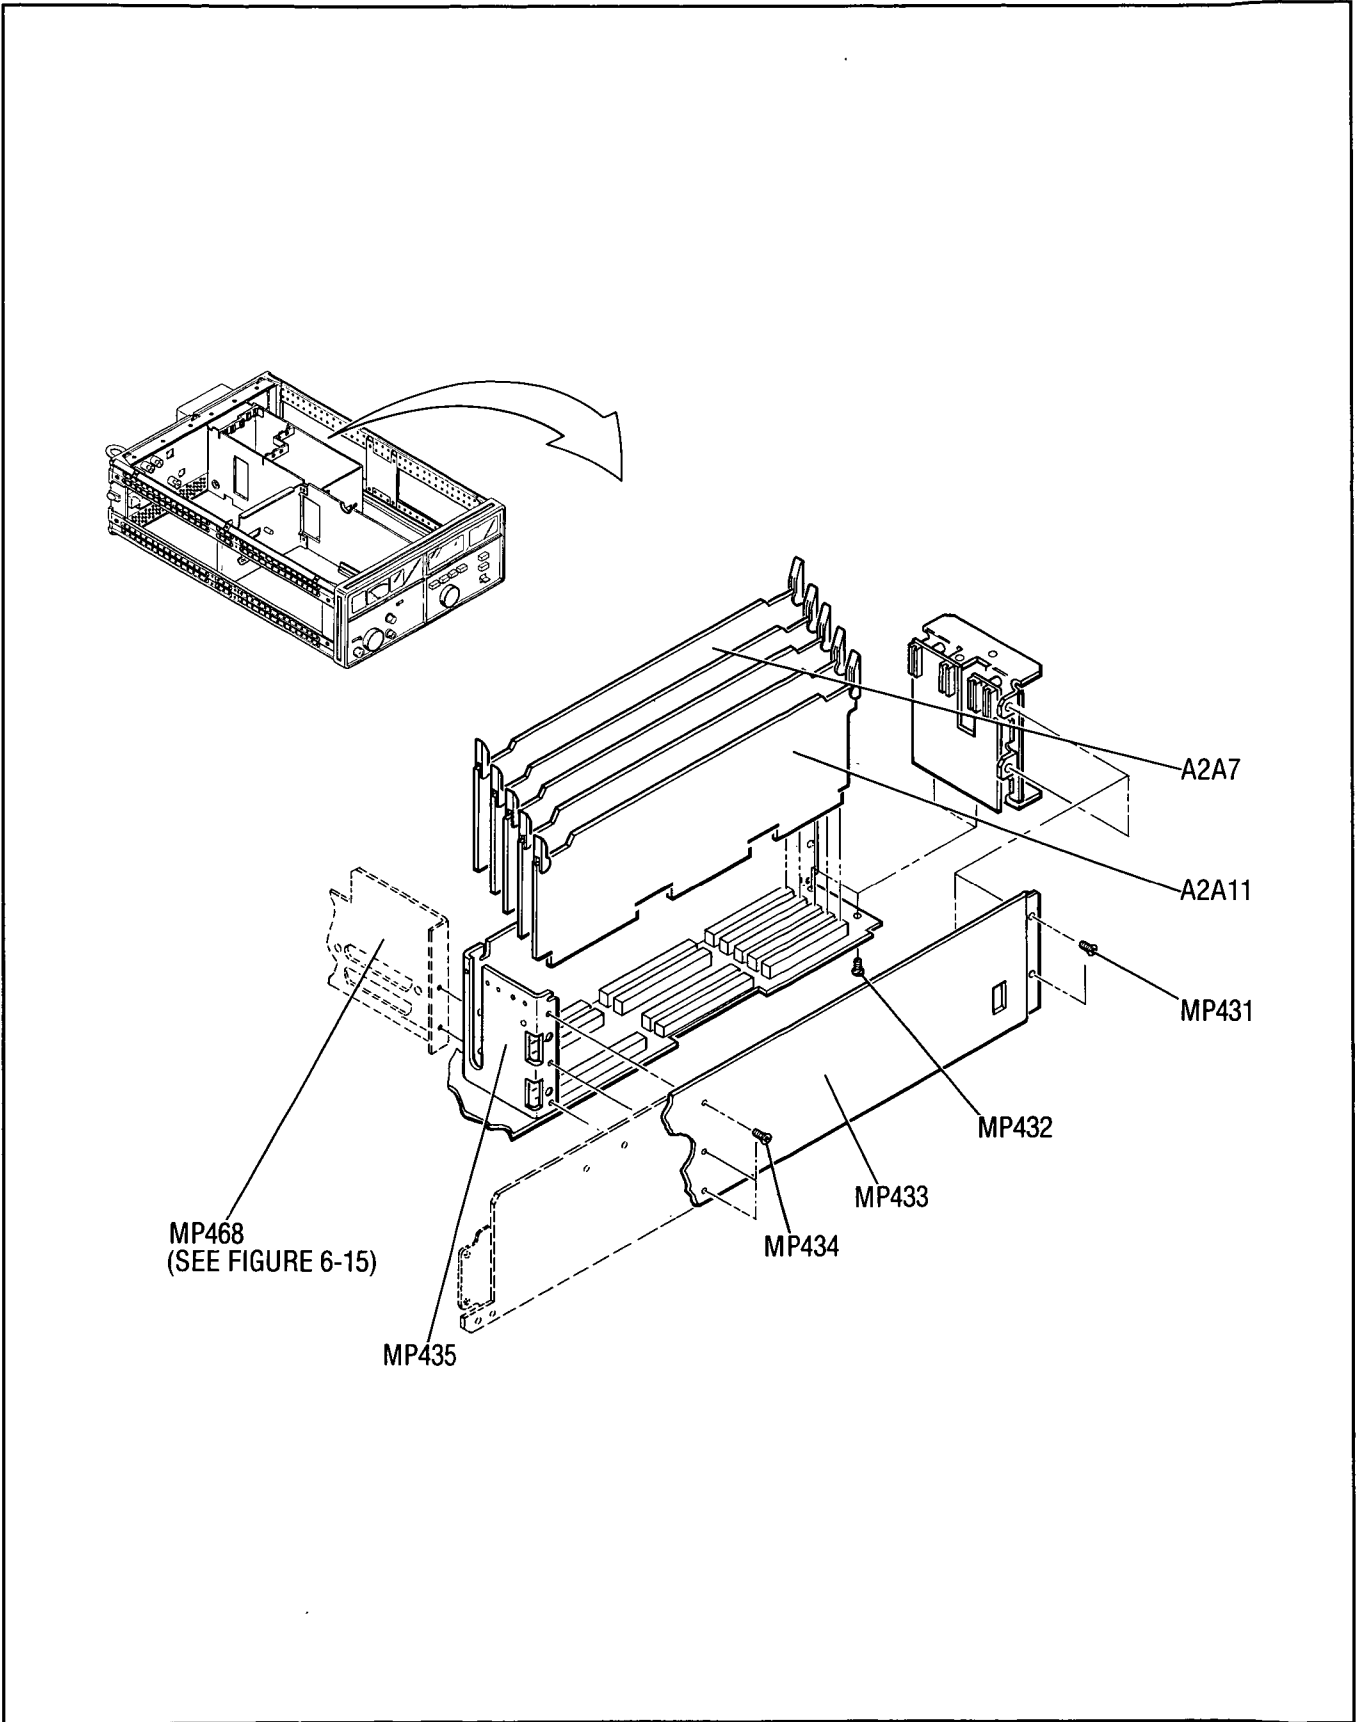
P/O A2 Controller Assembly and Rear Panel Illustrated Parts Breakdown
